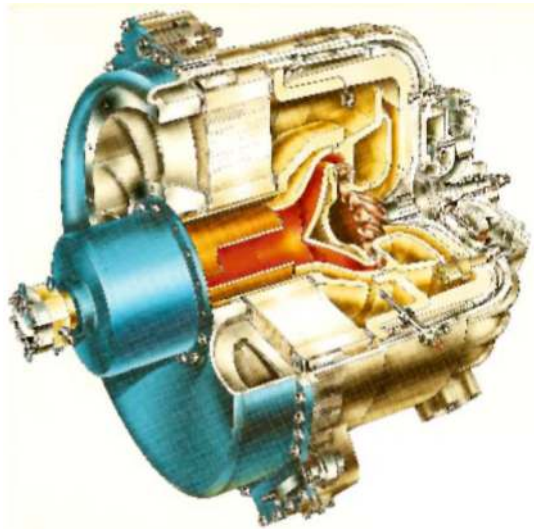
Early automotive gas turbine using foil bearings for the high-speed core shaft proved the technology for combustion driven turbomachines.
